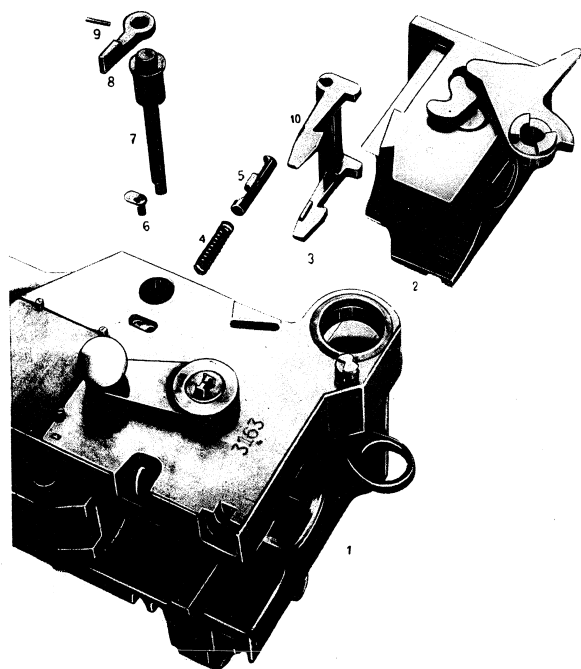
EXTRACTING PARTS — DISMANTLED
